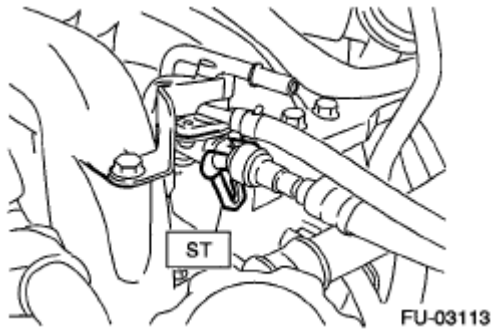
Inserting Front Side Of Connector Remover 18371Aa000 Into Quick Connector
